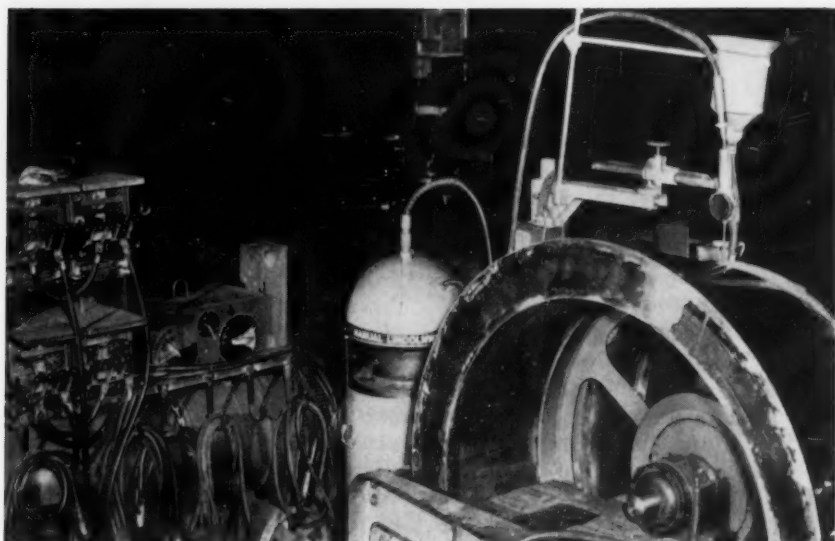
After tack welding the spider flange and the intermediate T-section supports to the shell, the unit is rotated in a floating fixture
